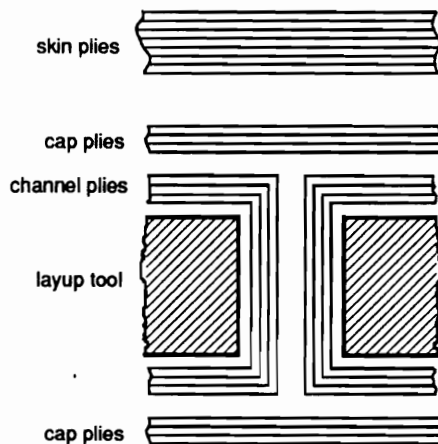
Illustration of I-Frame Fabrication Technique
